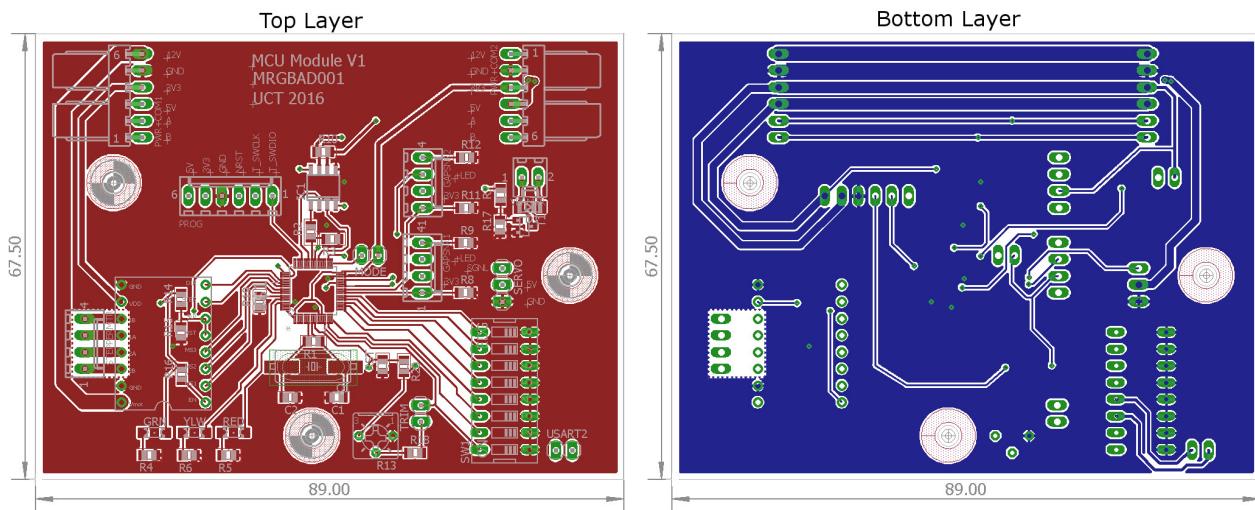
PCB layout of the MCU Module, top and bottom layer.
